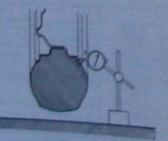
Checking wheel run out with a dual gauge and stand (Set 9)
